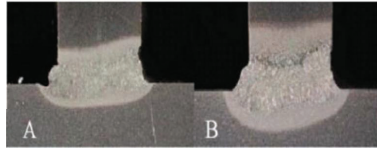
Welds welded with the highest welding speed to achieve full penetration (a) CO₂ laser weld, $P_L = 5$ kW, $v_w = 0.9$ m/min. (b) Nd:YAG laser weld, $P_L = 3$ kW, $v_w = 0.3$ m/min. S355K2G3 steel with web thickness of 6 mm (Ref. 4).
